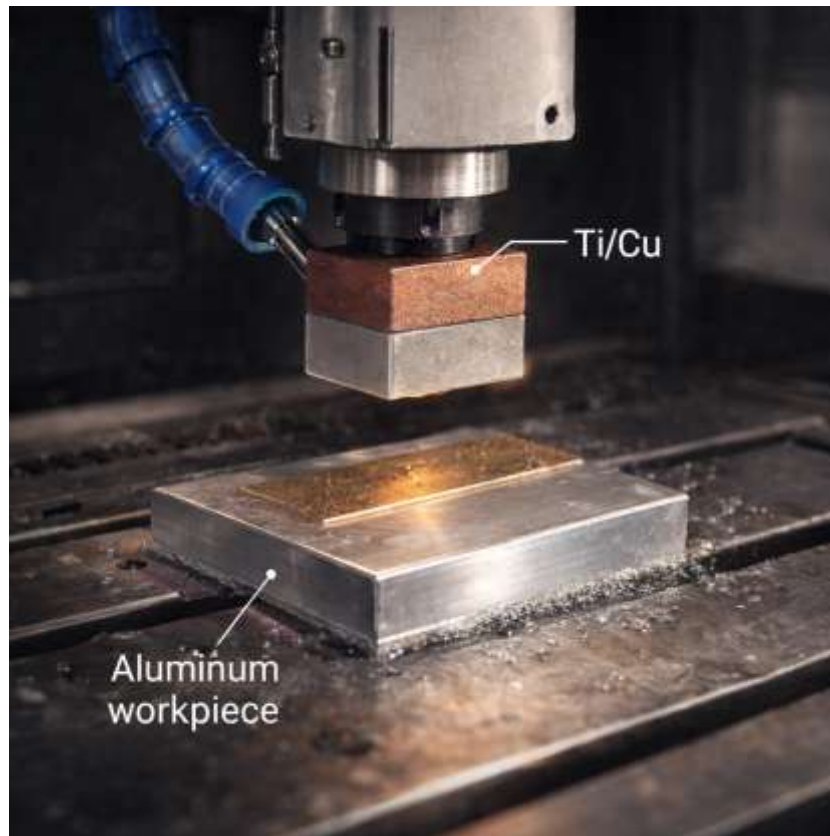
Formation of Ti/Cu Coating Layer on Aluminum Using EDC Technique
